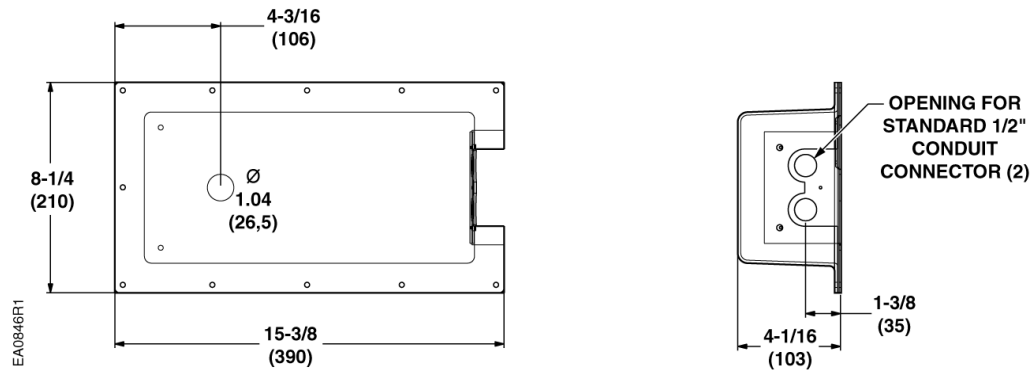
Dimensions of the ASK75.1U Weather Shield in Inches (Millimeters).
